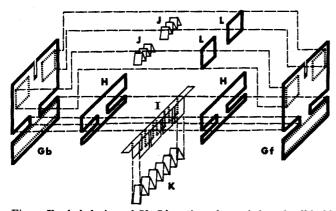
Exploded view of Gb-Gf section of near-infrared cell holder.
